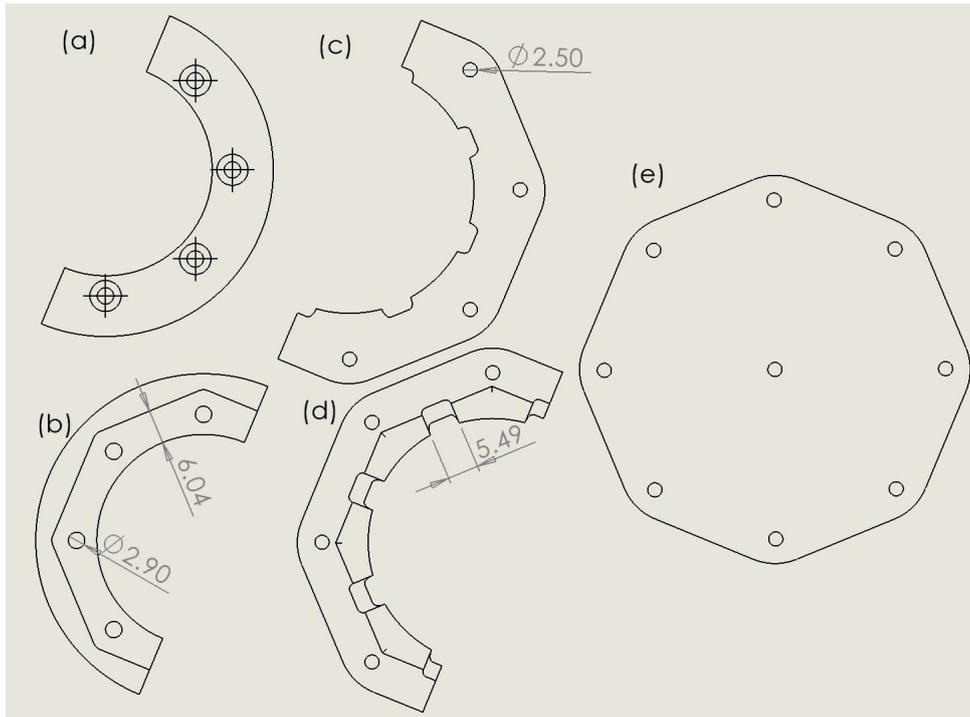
The connection pieces, with all dimensions in mm. (a),(b): The top and bottom view of the mounting pieces respectively. (c),(d): The top and bottom view of the connectors respectively. (d): a bottom view of the end cap.
